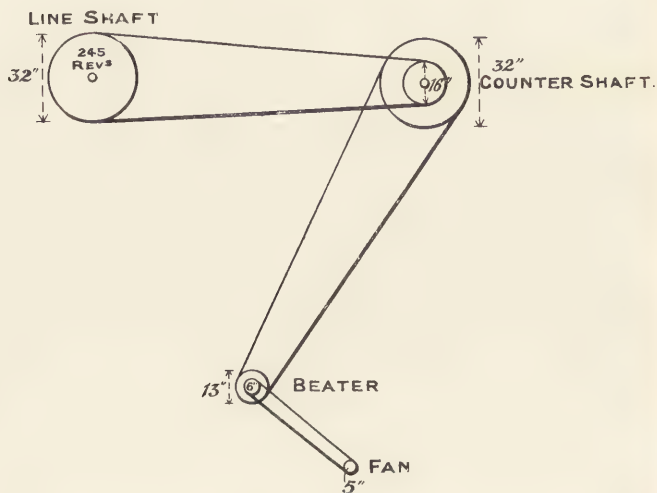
VERTICAL SECTION THROUGH THE LINE SHAFT, COUNTER SHAFT, BEATER, AND FAN.
